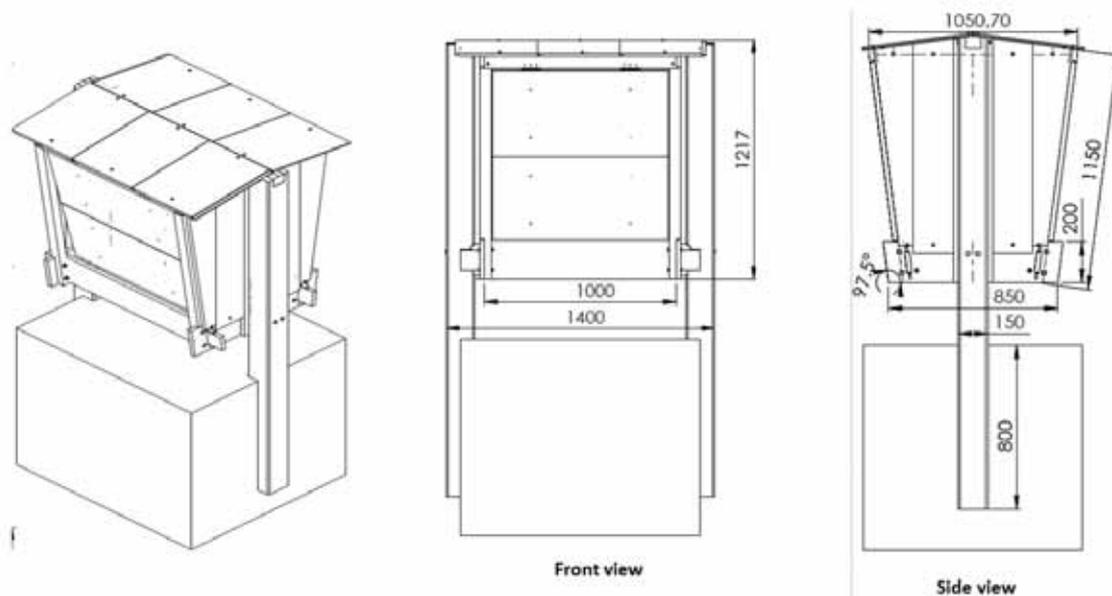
Concepts, designs, and dimensions – Automatic equipment to supply mineral salt.
